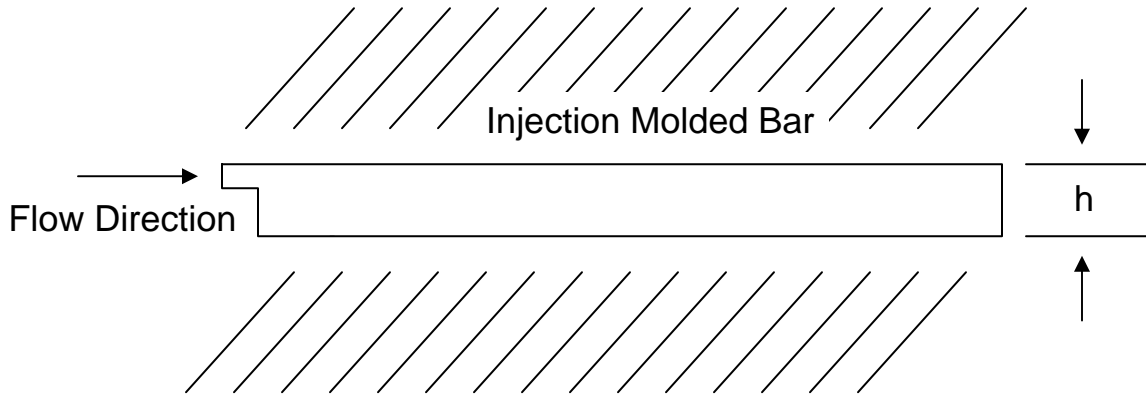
A cross-sectional view of the injection molded rectangular test bar.
